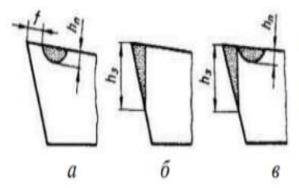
Types of operation: a - on the front surface (hole); b - on the back surface (platform); c - on the front and rear surfaces
